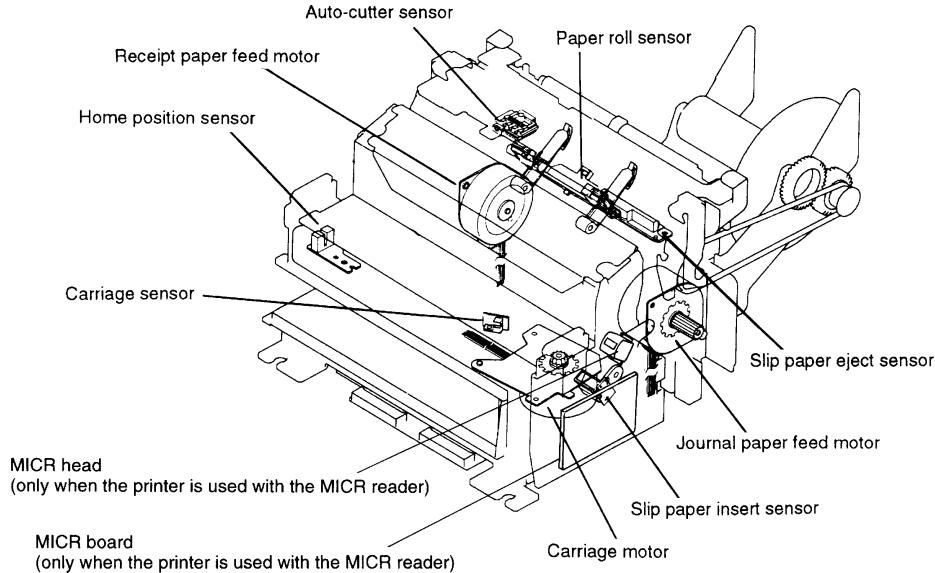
TM-U950 Printer Mechanism Main Unit Configuration
